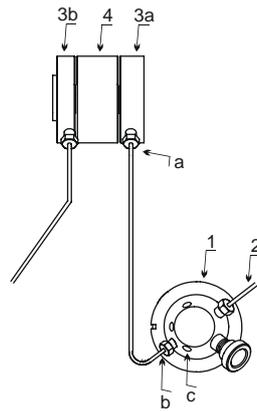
Connections between mixing chamber and purge block (all pumps except P680A DGP-6)
